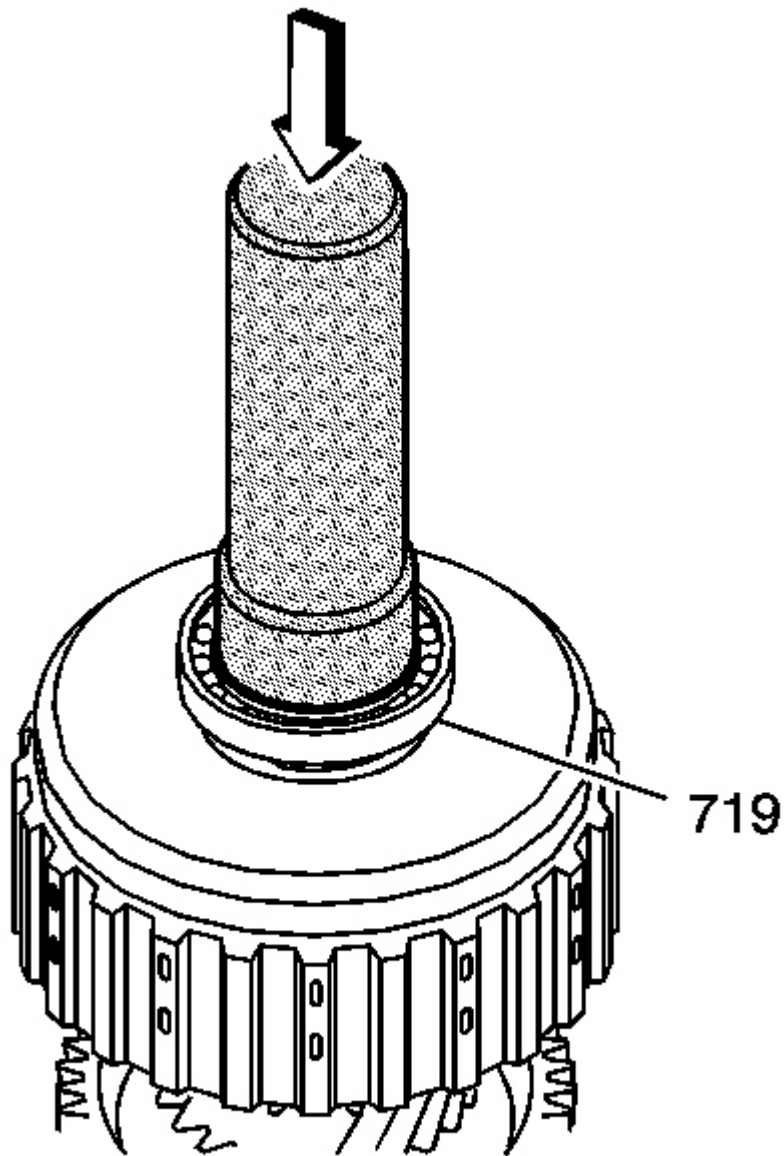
1st And 2nd Clutch Shaft Rear Bearing
